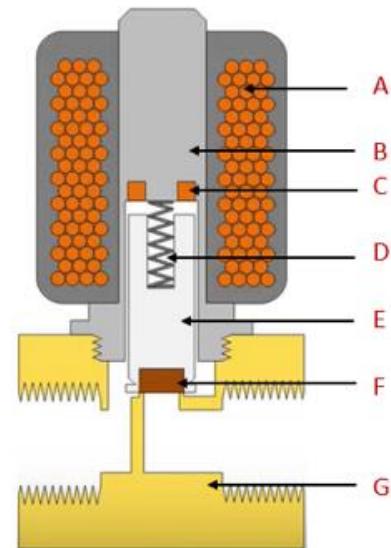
Components of a solenoid valve; coil (A); armature (B); shading ring (C); spring (D); plunger (E); seal (F); valve body (G)
